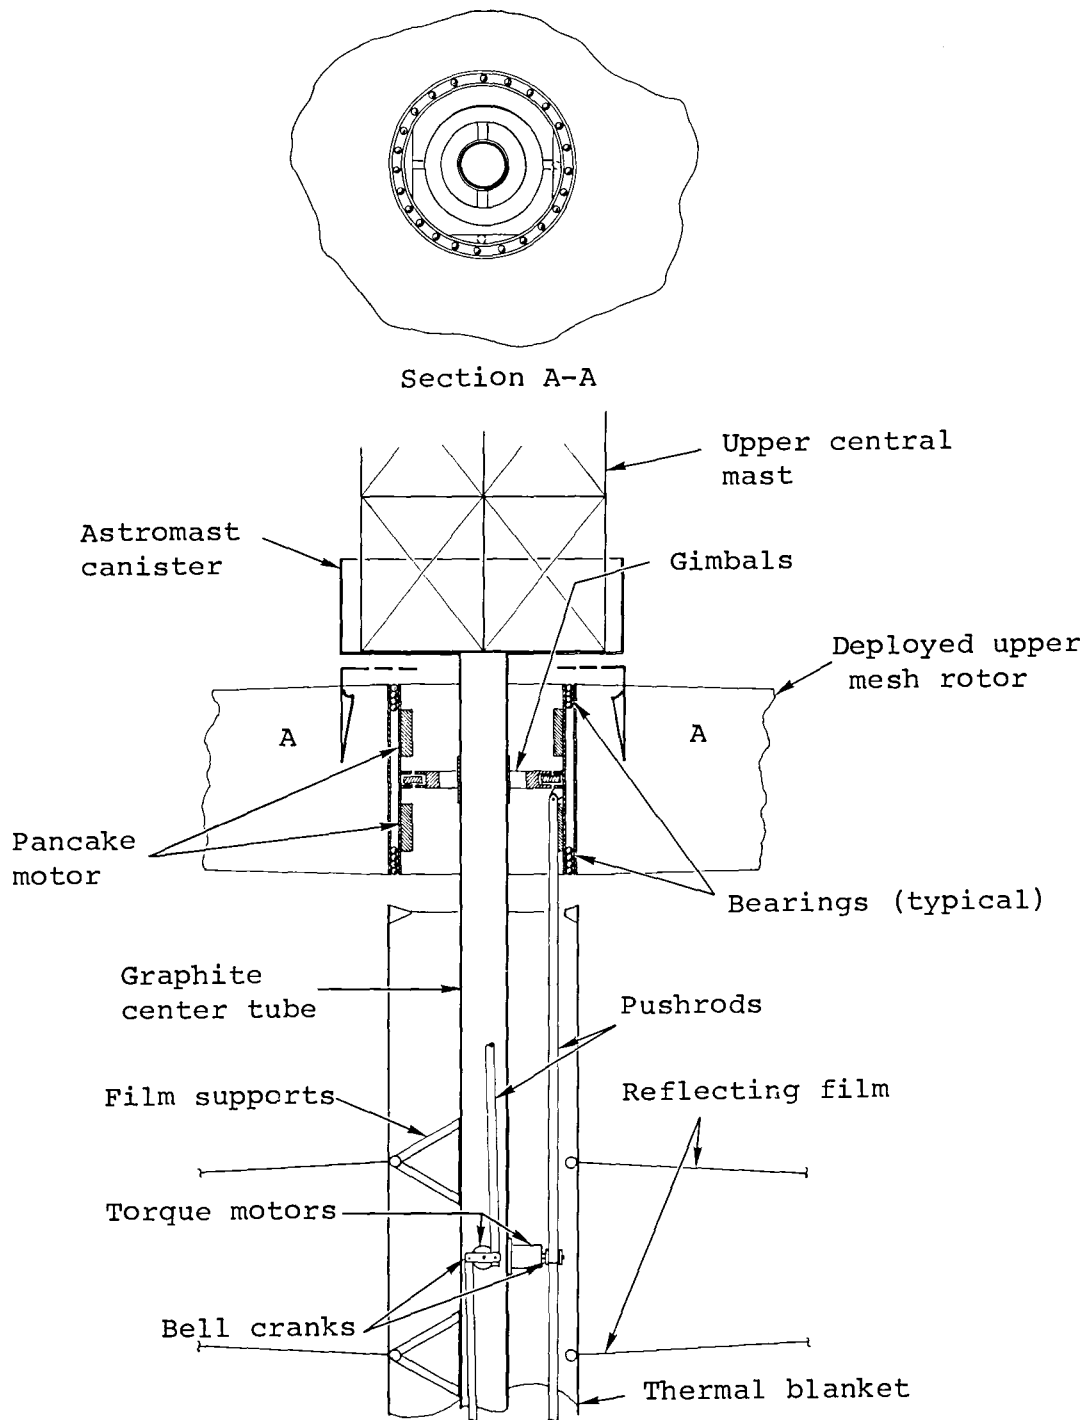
Cutaway view of center body showing details of twin-rotor control-moment gyro.
